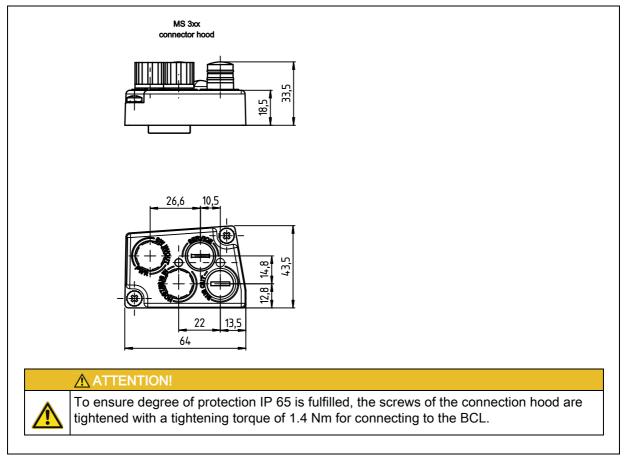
Dimensioned drawing of MS 3xx connector hood
